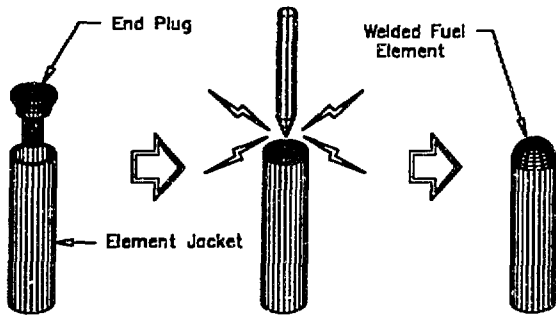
Sequence Of An End Plug Being Loaded Into and Welded To An Element Jacket
